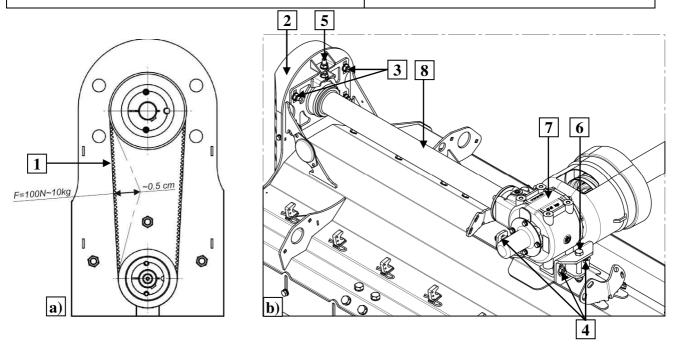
a) Overview of the belt gear in VINO flail mowers; b) belt tensioning system in VINO flail mowers
